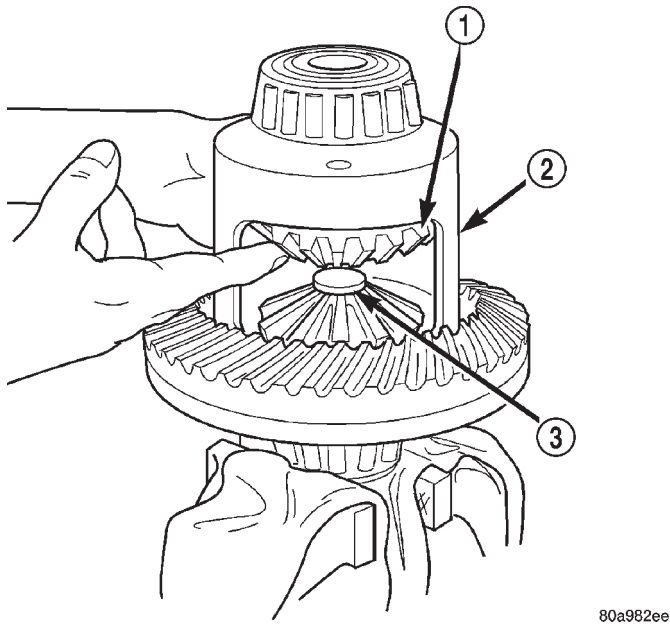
Upper Side Gear & Clutch Disc Pack Installation
